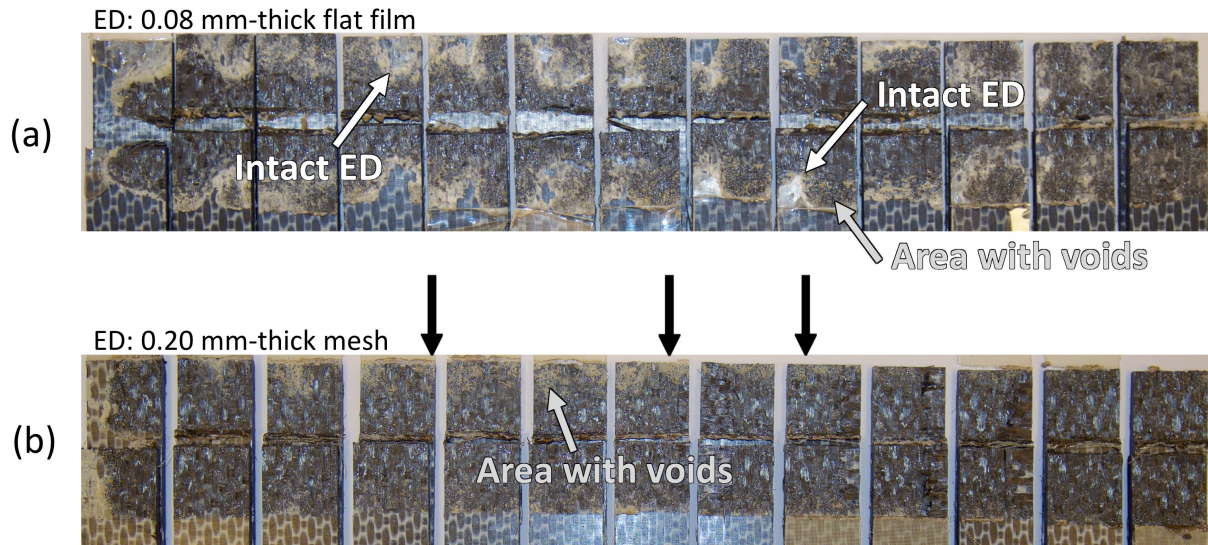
Representative fracture surfaces obtained after lap shear testing of 220 mm-long laminates continuously welded with two different types of energy directors: (a) 0.08 mm-thick flat film, and (b) a 0.20 mm-thick mesh. The white arrows indicate intact ED. The grey arrows indicate areas with voids. Welded with 45 mm/s with 500 N welding force and an vibrational amplitude of 82.5  $\mu\text{m}$
